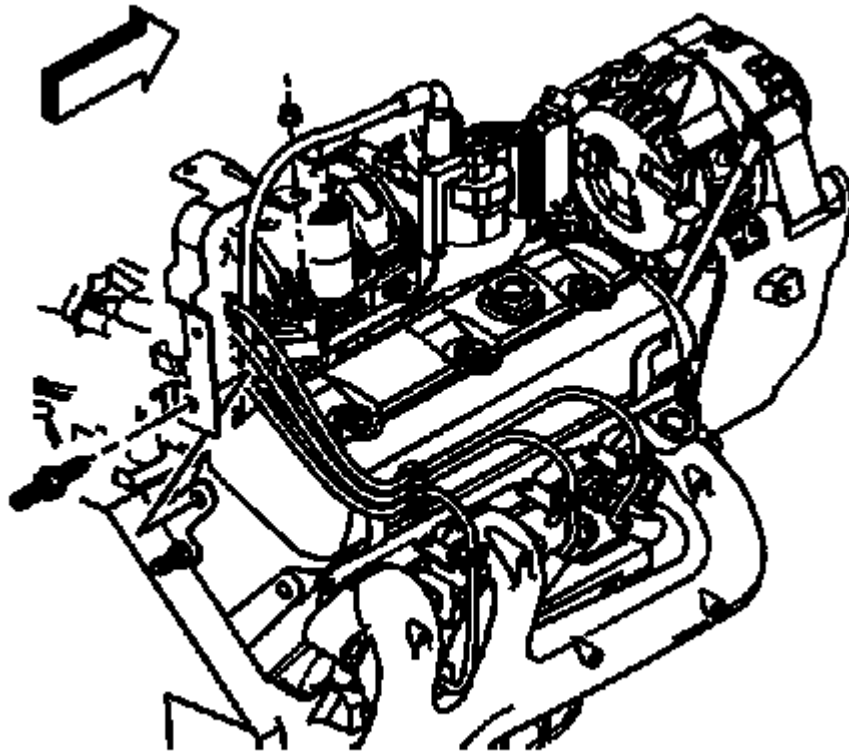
View Of Engine Wiring Harness Rear Bracket Nut
